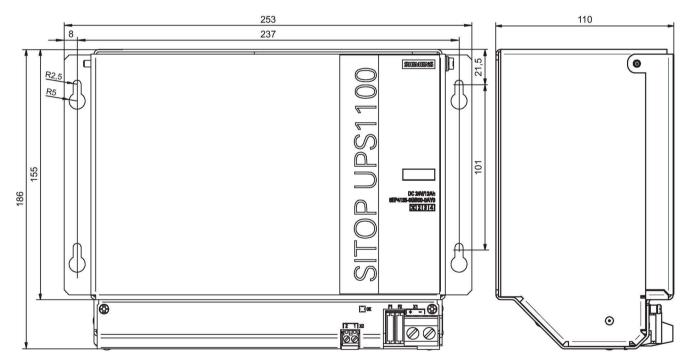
Dimension drawing 6EP4135-0GB00-0AY0
